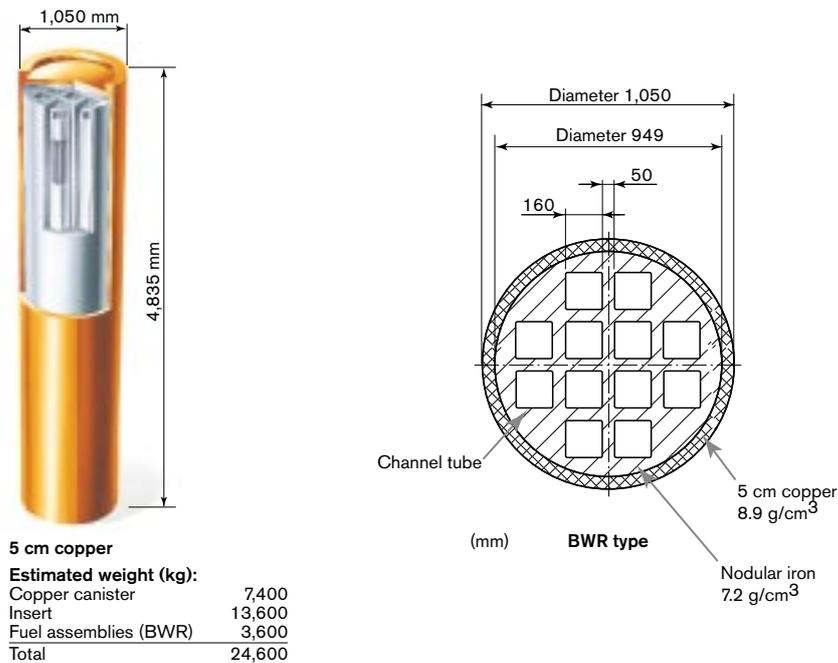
The canister with its cast iron insert and copper shell. Exploded view on the left hand side and cross section on the right hand side.
